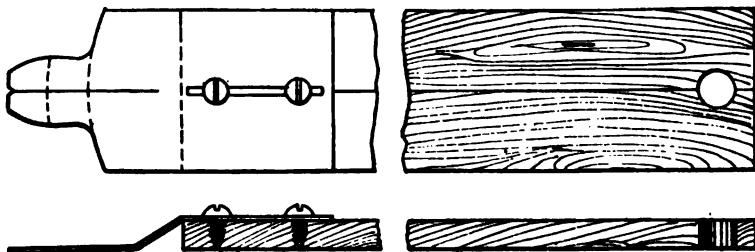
Template Used to Lay Out Teeth of Spur Gear
